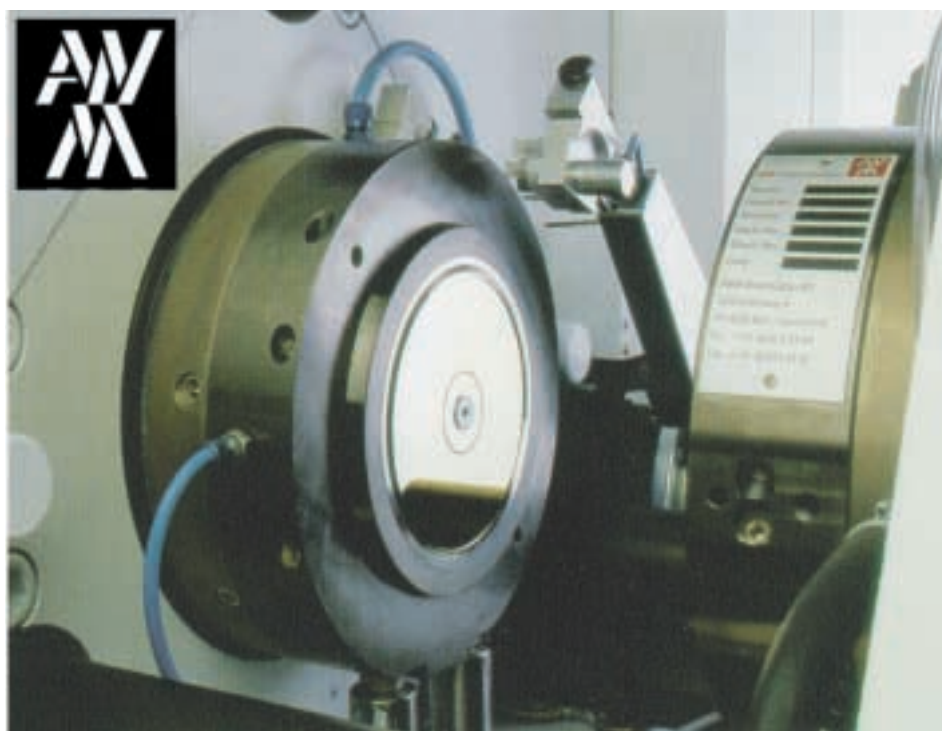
Compact disc injection moulding tool (AWM Werkzeugbau) installed in a Netstal Discjet injection moulding machine.
